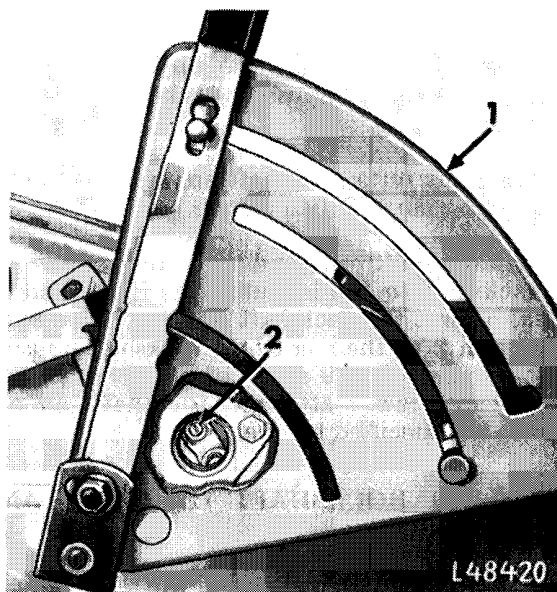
Adjusting Valve Linkage and/or Control Lever Neutral Range
